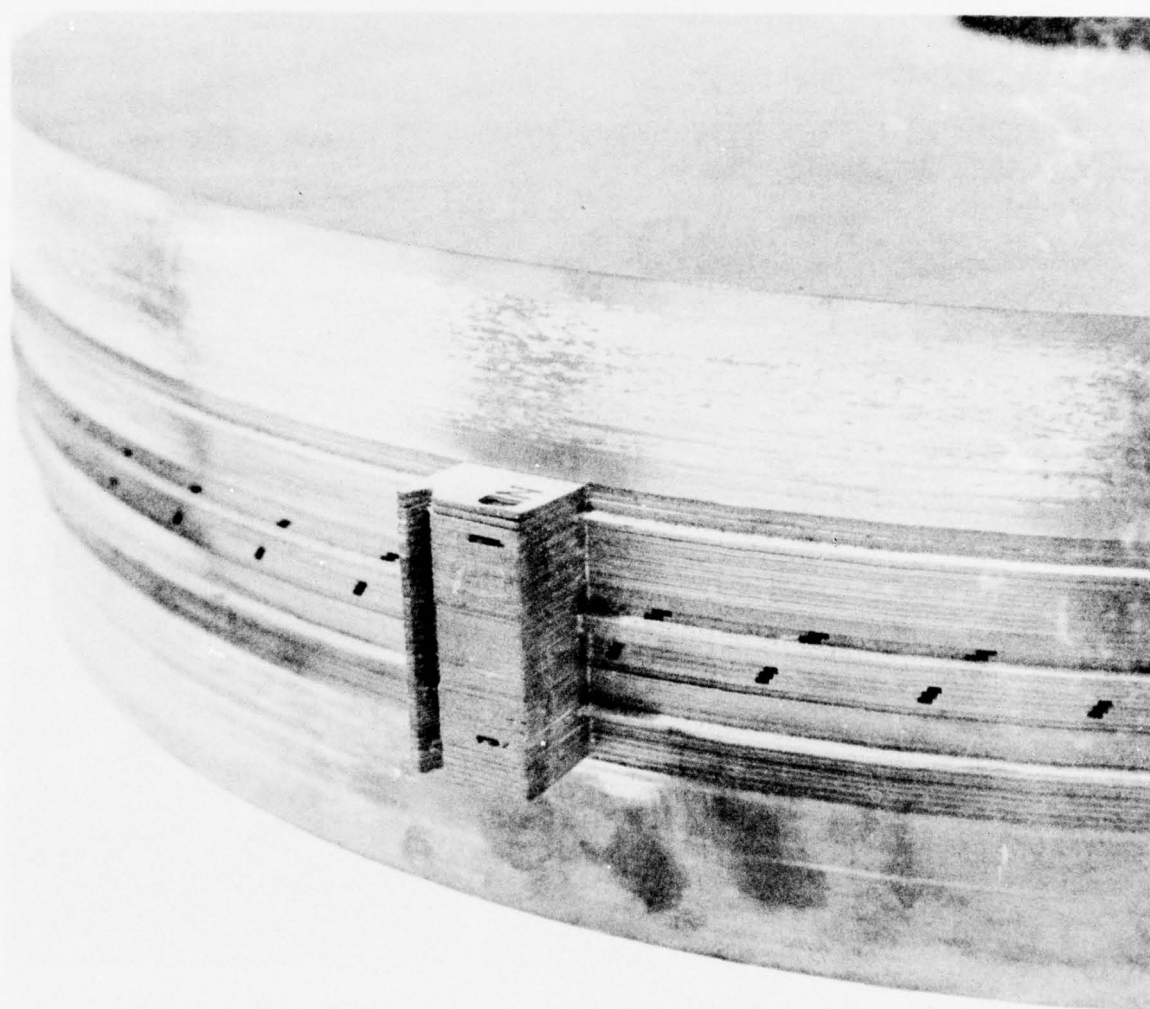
Completed Laminated Wheel Stack at the Blank Outer Diameter Tab Area.
